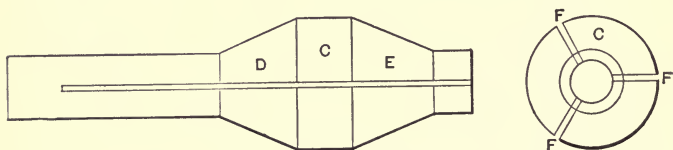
SIDE AND END OF SPLIT PIECES.
